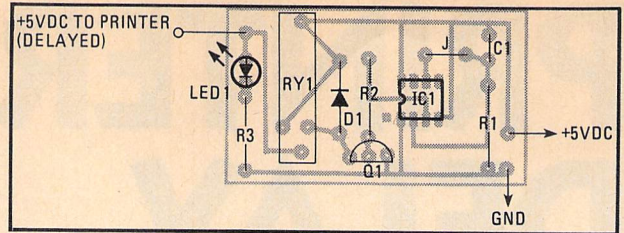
POSITION THE PARTS on the printed circuit board as shown in this reversed view. The LED mounts atop the board and protrudes through the drilled hole in the cabinet cover.
